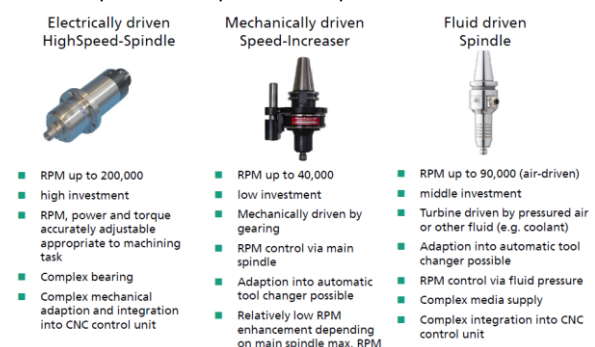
Comparison of spindle solutions for RPM enhancement which are adaptable in addition to the machine tool main spindle.
